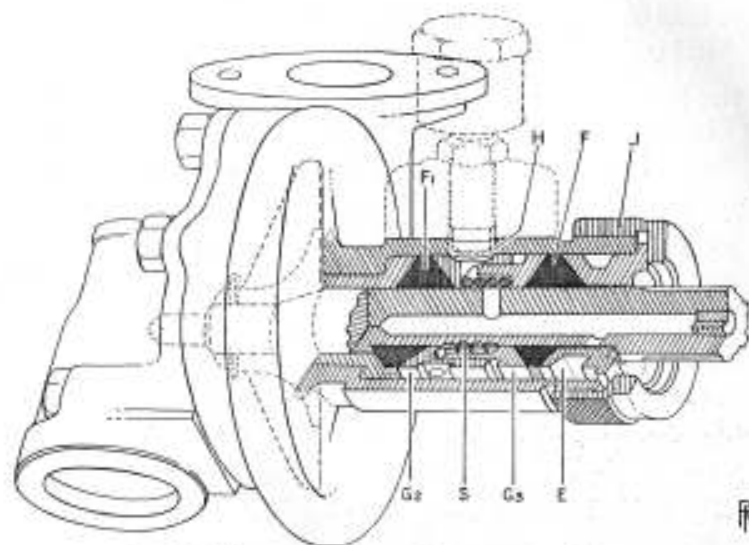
WATER PUMP WITH SELF-ADJUSTING GLAND.
